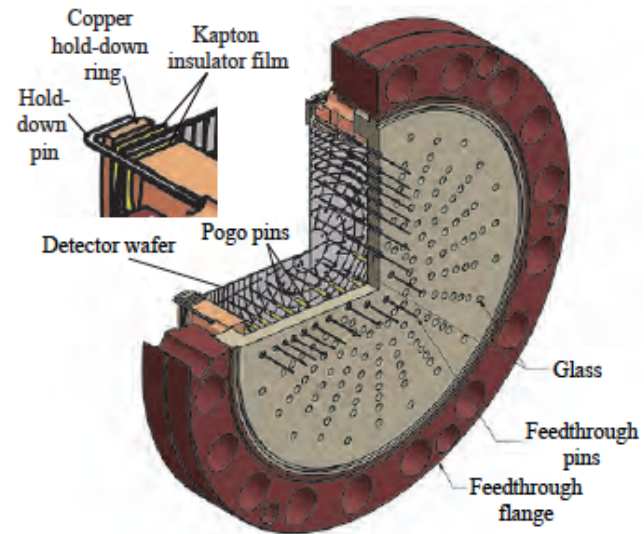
Mounted detector wafer (back) with spring-loaded pogo pins and feedthrough flange. The inset is a close-up view of the detector compression scheme.
